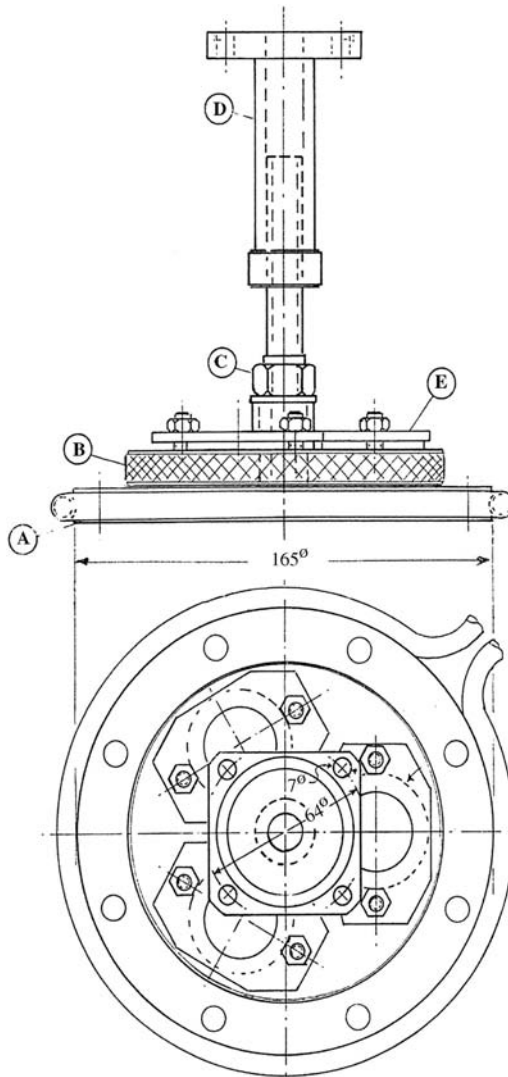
(a) Arrangement for changeable windows for optical pyrometry, assembly drawing.
